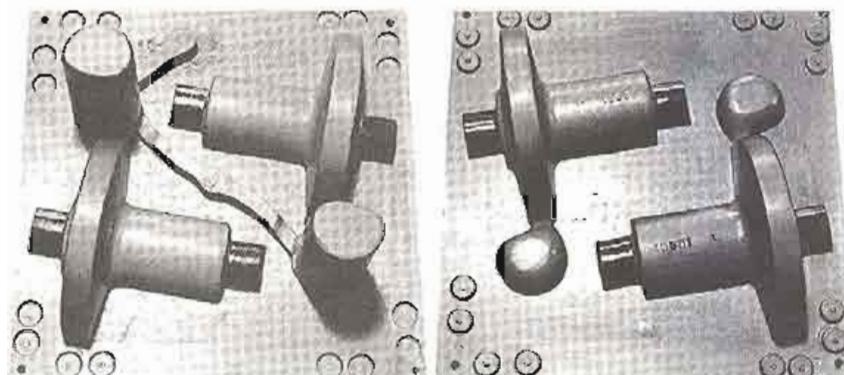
Cope-and-drag pattern for producing two heavy parts. (Left) Cope section; (right) drag section. (Note: These are two separate pattern boards.)
